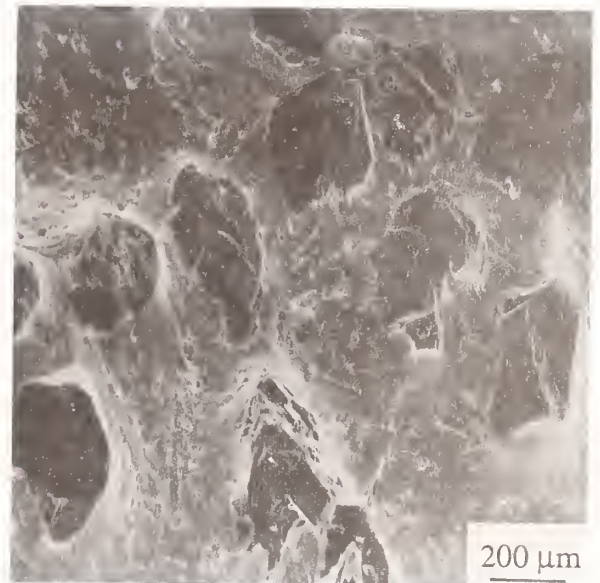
surface topography of abrasive tool of Type A after dry grinding of cast iron.
